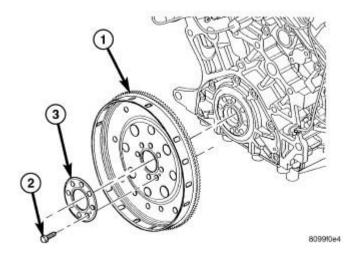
Flex Plate With Bolts & Backing Plate Courtesy of CHRYSLER LLC
